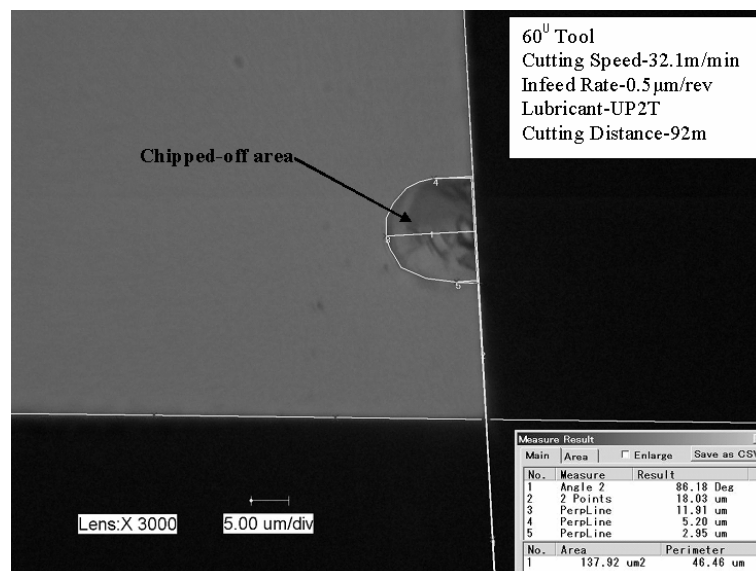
Keyence image of chipped-off area on left flank face of a 60° tool (tool-2), after 92m cutting distance
